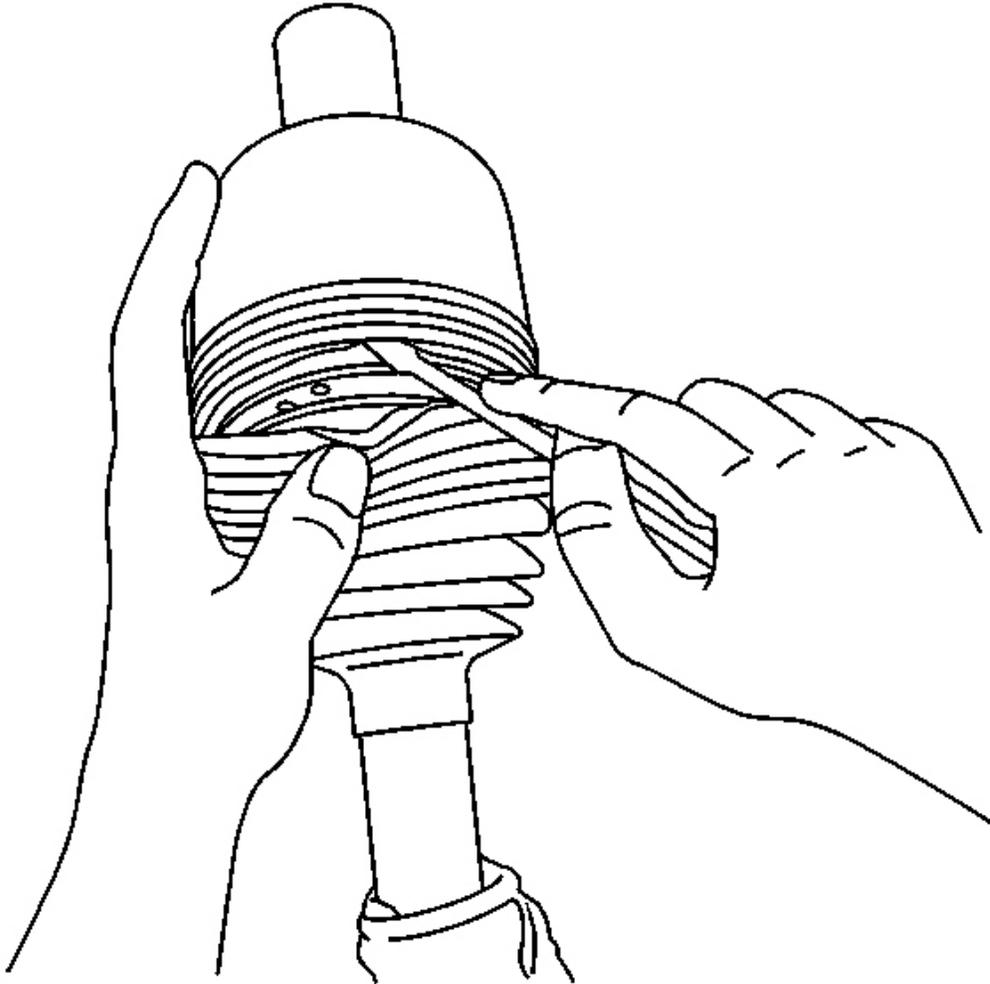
Removing The Large Seal Retaining Clamp From The CV Joint Seal
